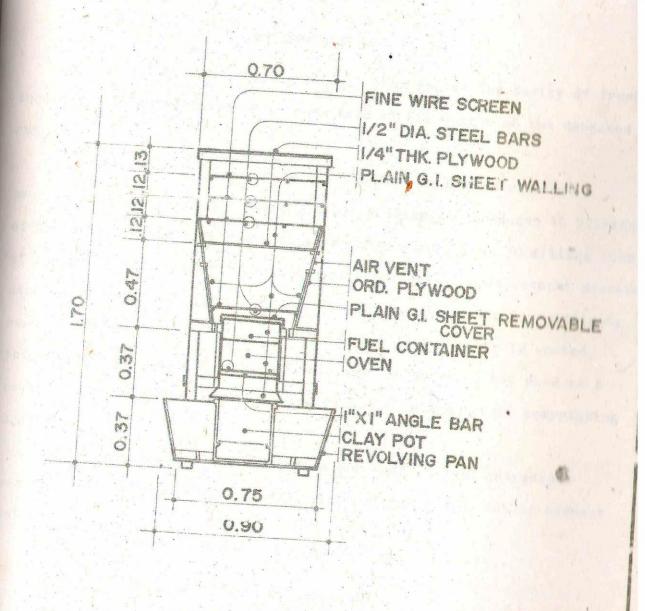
TYPICAL CROSS SECTION Scale: 1:20 meter
